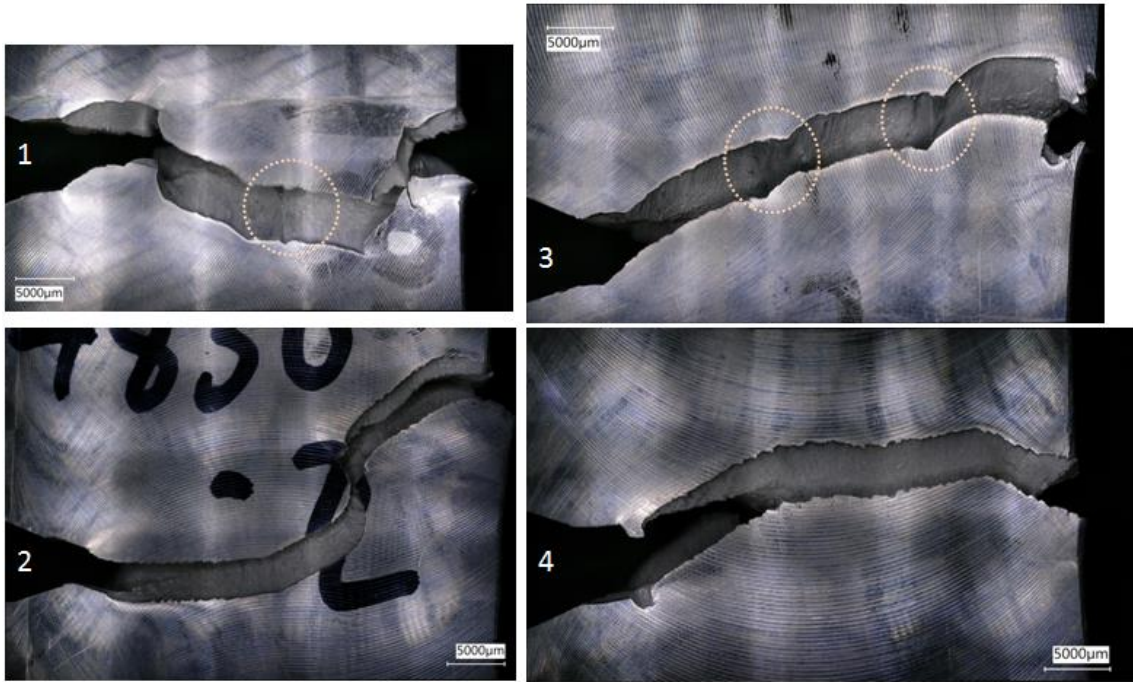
Fracture surfaces from the side view for thinner/faster/cast build samples
